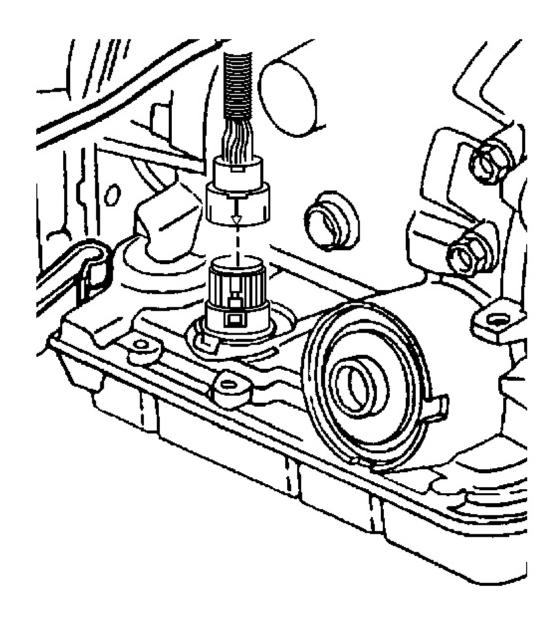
Identifying Valve Body Electrical Connections Courtesy of GENERAL MOTORS CORP.
